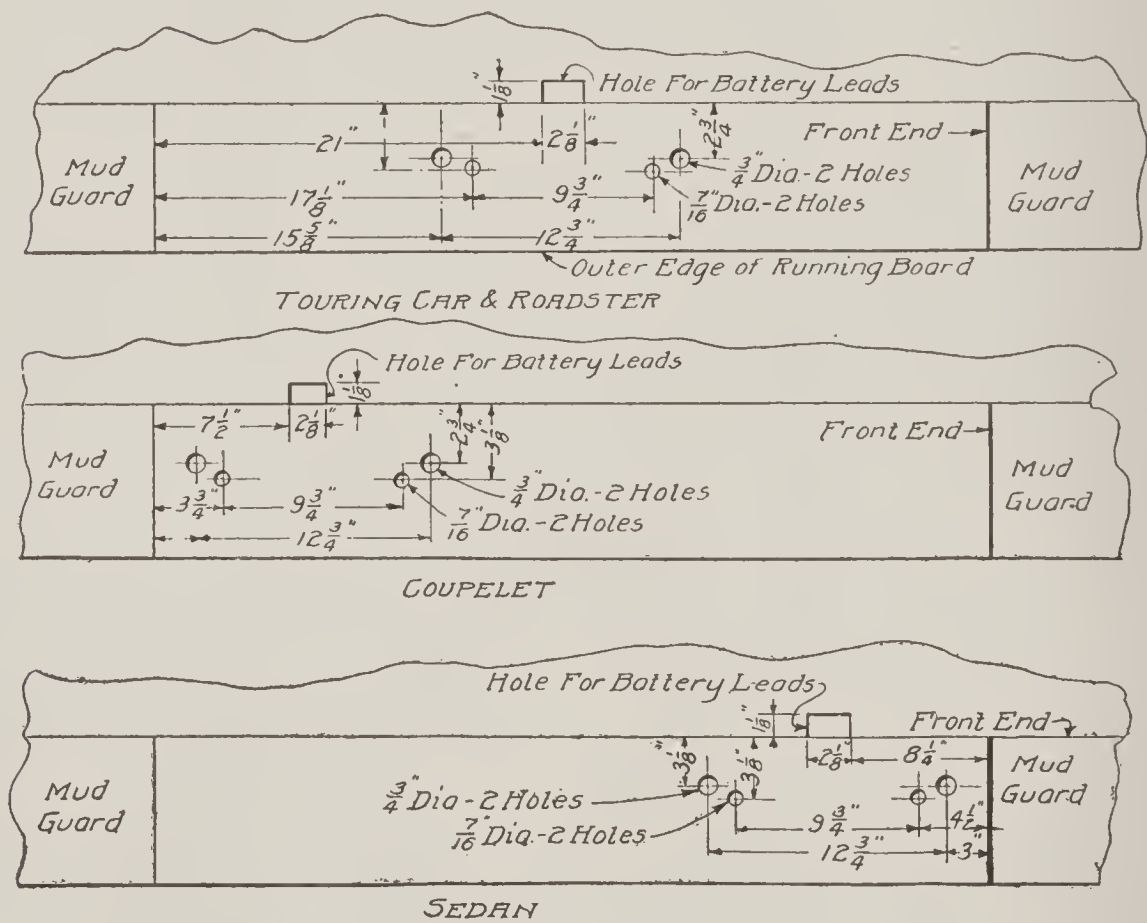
Layout of Right Running Board for Mounting Battery Box on All Ford Models
